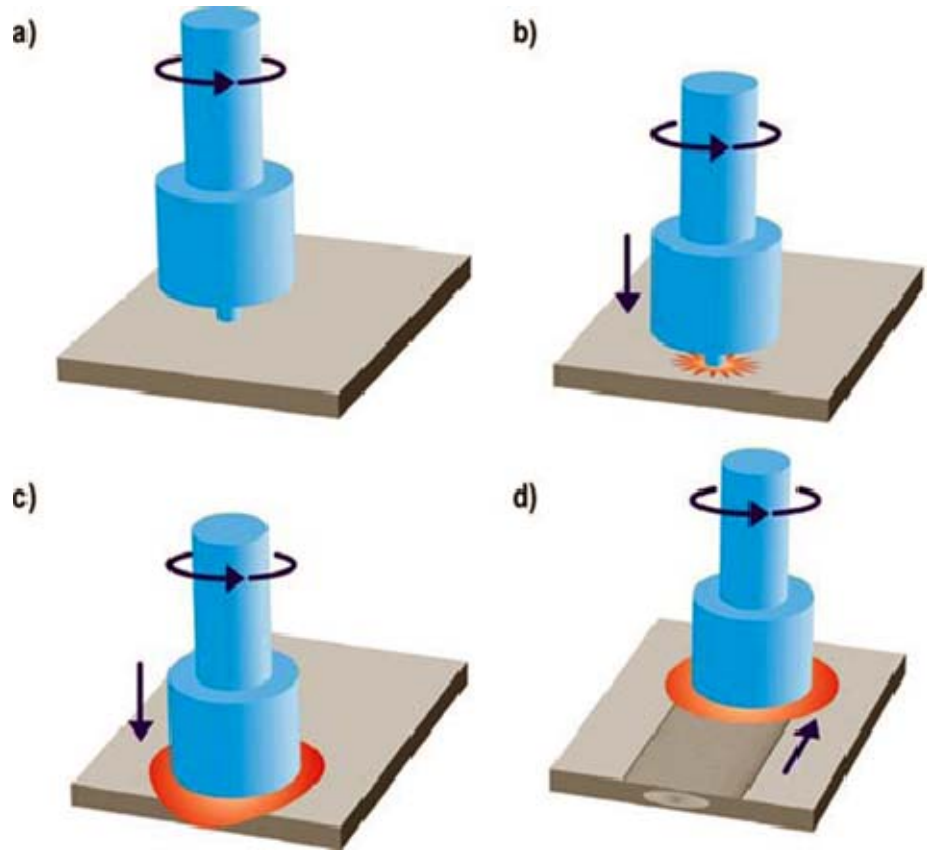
Friction Stir Processing: (a) Rotating Tool (b) Initial Plunge into Surface of Work Piece (c) Plunge to Desired Depth (d) Traverse of Tool. From [21]
